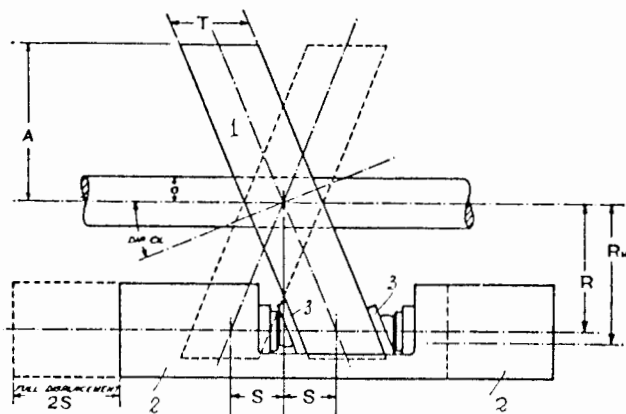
SLANT-SLIPPER TYPE OF CRANKLESS MECHANISM SHOWN IN OUTLINE
